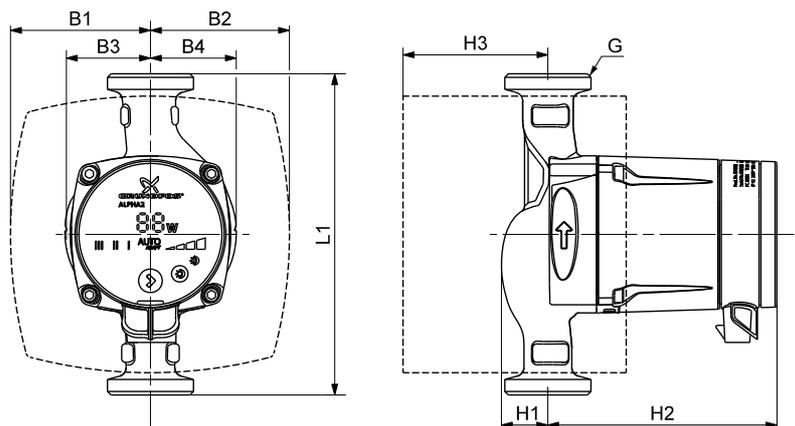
Dimensional sketches, ALPHA2 XX-50, XX-60
